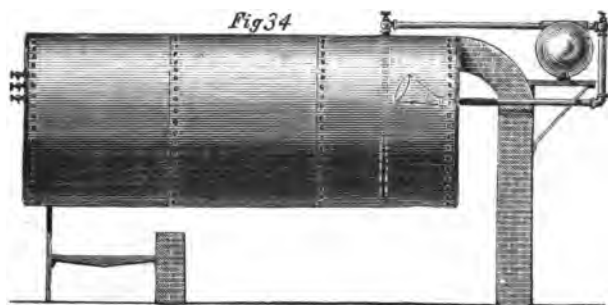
shows the cleaner placed back of the boiler, when, for instance, a low ceiling would not allow it to be placed on top. Fig. 35 shows the reservoir placed on side wall, if for any cause, such as steam drum or manhole being in the way, it could not be applied in the ordinary manner. Fig. 36 shows connection of the return pipe to a mud drum, when if for any reason such connection is desirable.
